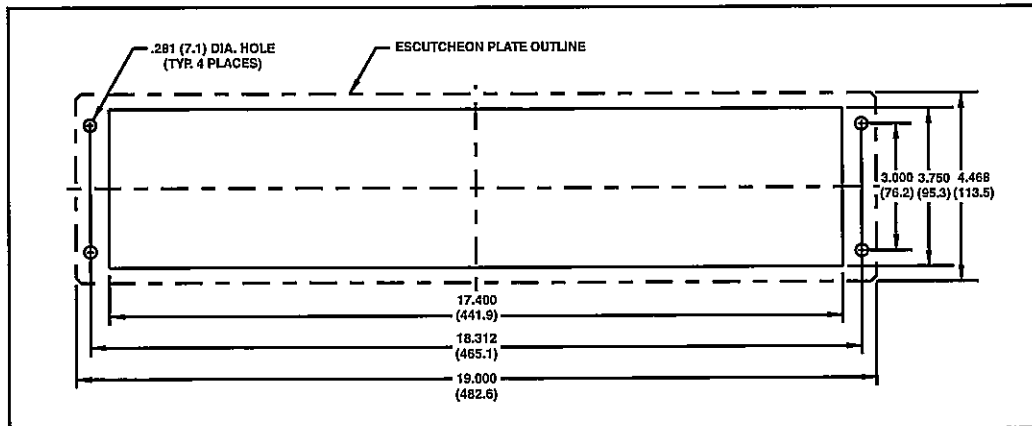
Panel Cutout Dimensions for Horizontal Unit
